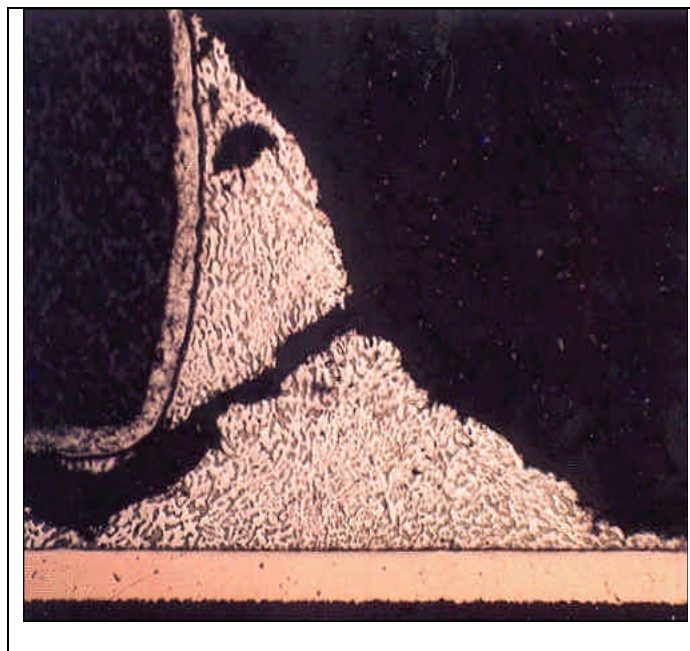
Micrograph Showing Crack Through Solder Fillet
